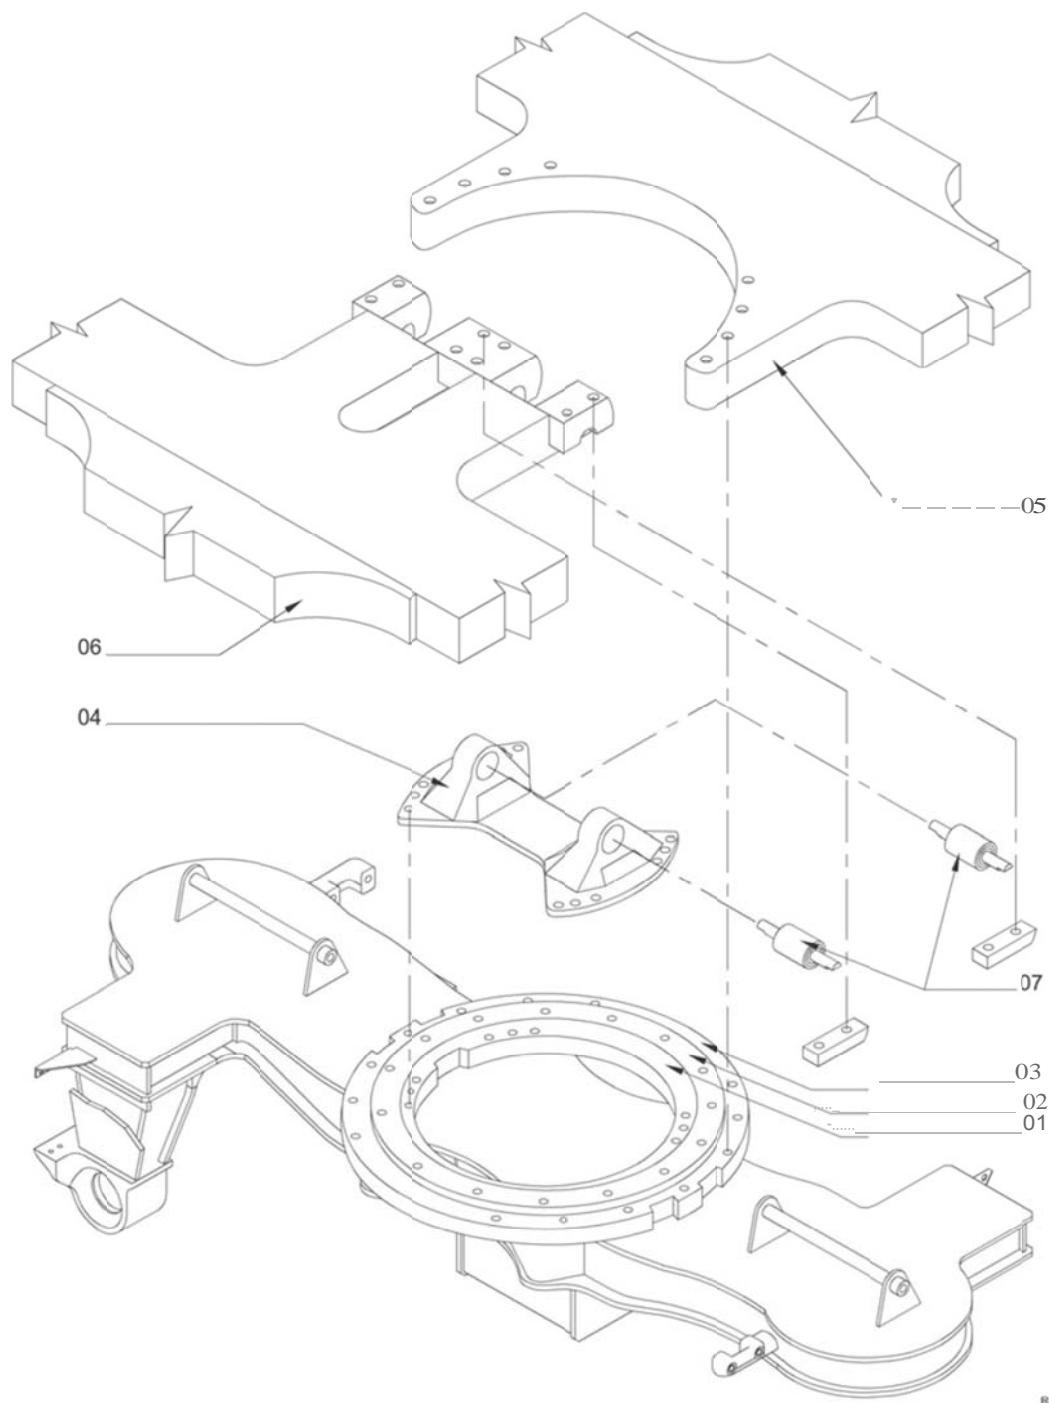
Rear Underframe Structure - Connection Detail
